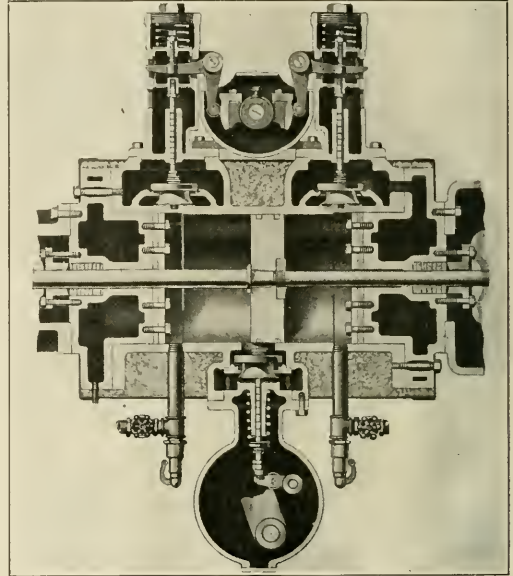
Cross Section of Dual Flow Steam Cylinder
